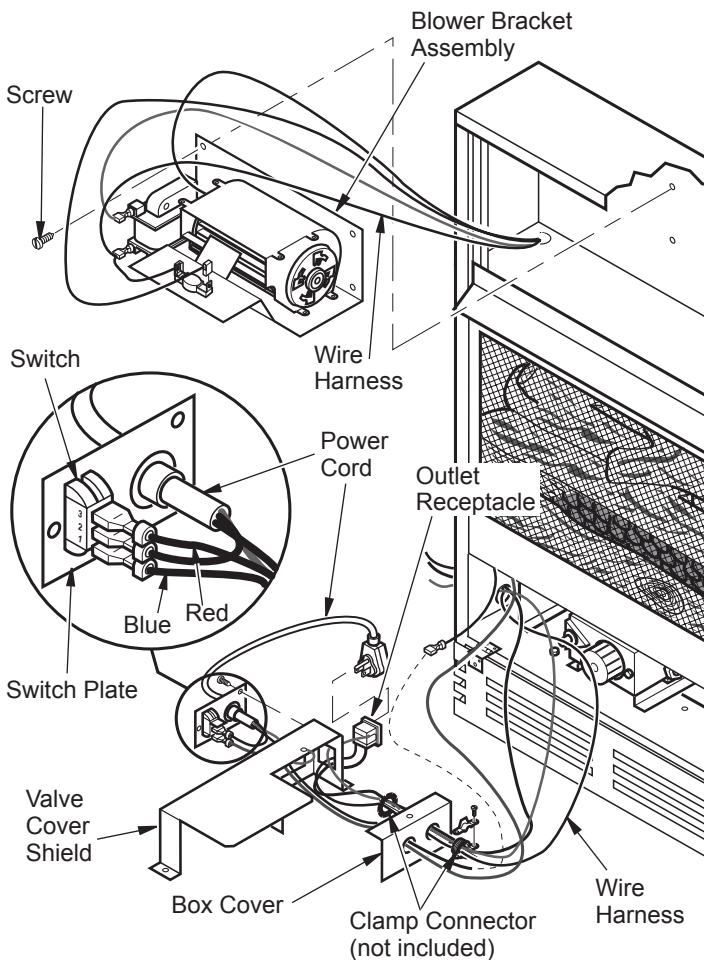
Installing Switch Plate to Valve Cover Shield
